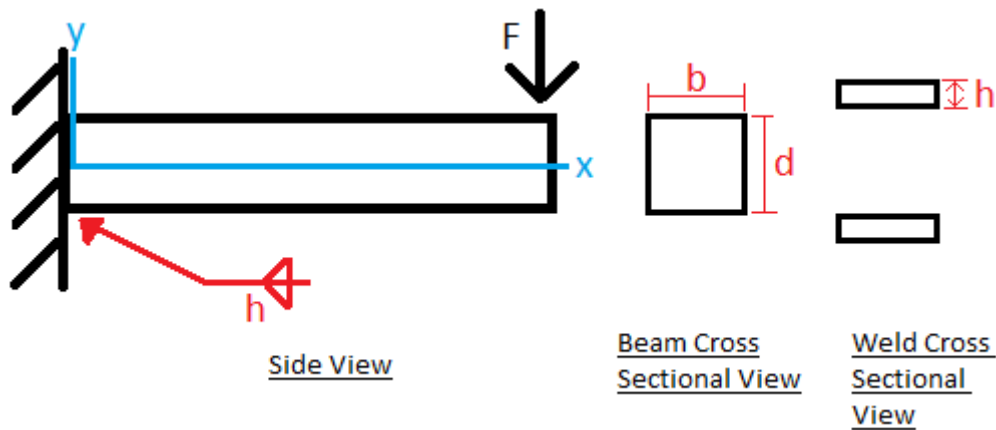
Welds in bending example setup, redrawn from [5], [7].
